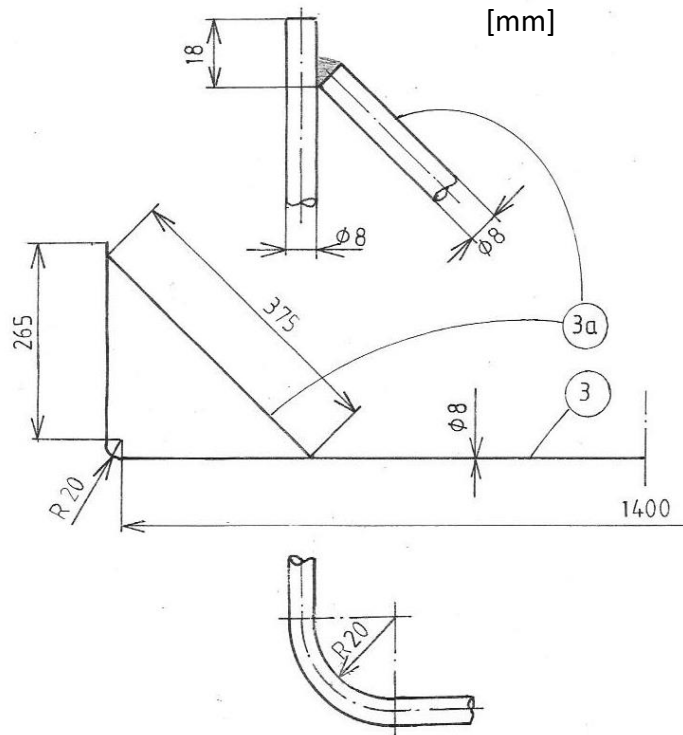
Basis (3) and welded-on Basis Stiffener (3a) for connection to the Vertical Stand (2) with two Rope Clamps (20) on each side, or for welded connection
